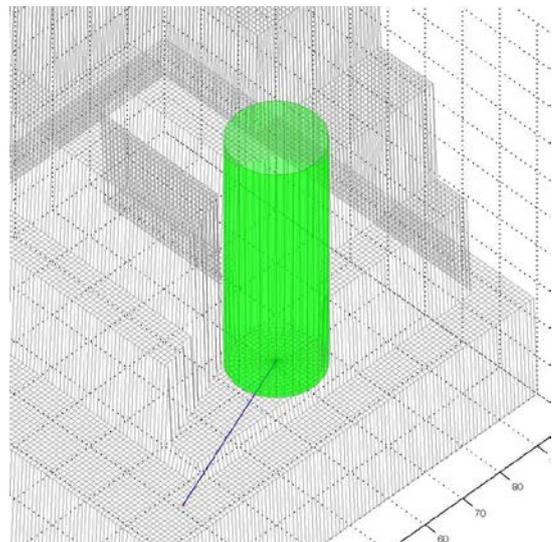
Tool position and transformed workpiece shape at the end of the first tool path segment
